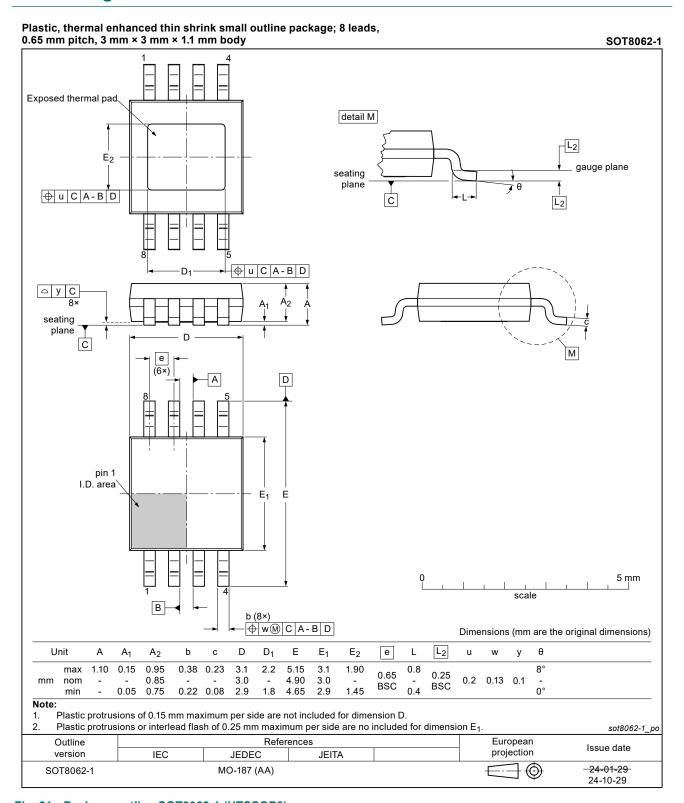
Package outline SOT8062-1 (HTSSOP8)
